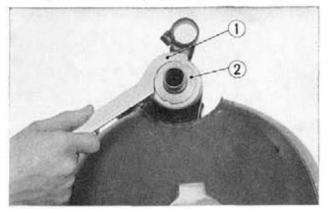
① Steering stem thread wrench ② Steering stem thread
